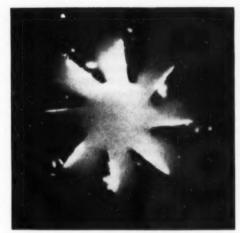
Autoradiograph of End Milling Cutter After Machining Radioactive Steel Showing Build-Up of Metal at Cutting Edges. Radiograph enlarged 2.5 ×
